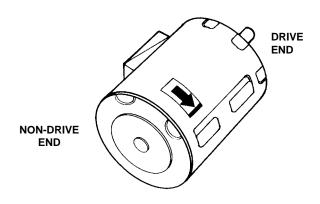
DRIVE MOTOR ROTATION
